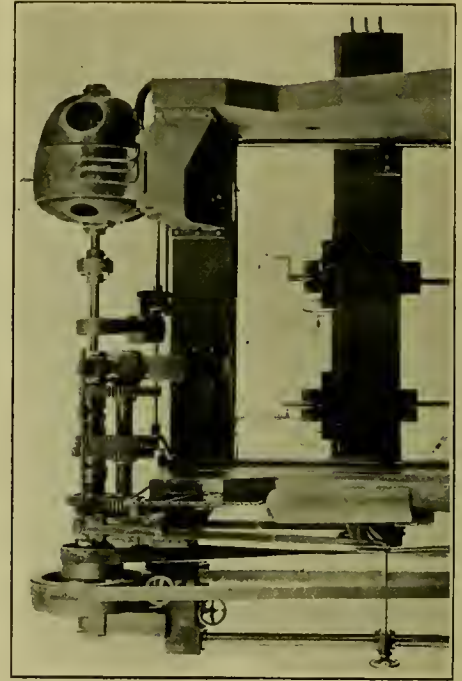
APPLICATION OF MOTOR TO L. W. POND MACHINE & FOUNDRY COMPANY'S PLANER.
